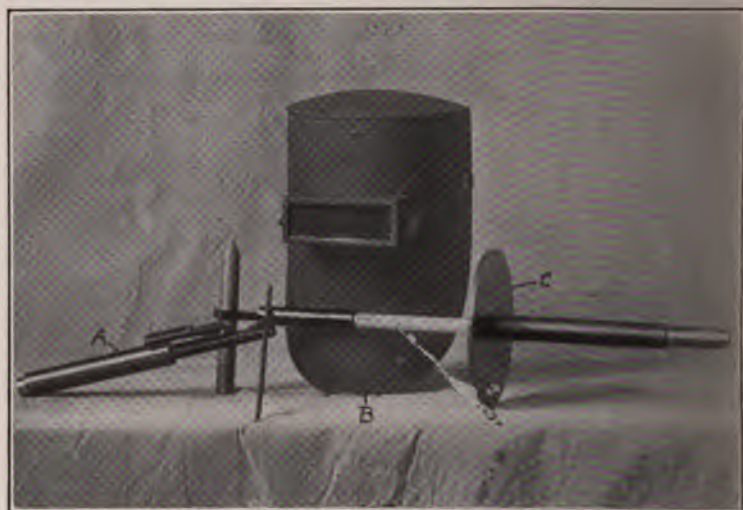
Accessories used in arc welding. (a) metal electrode holder. (b) mask. (c) carbon electrode holder.
